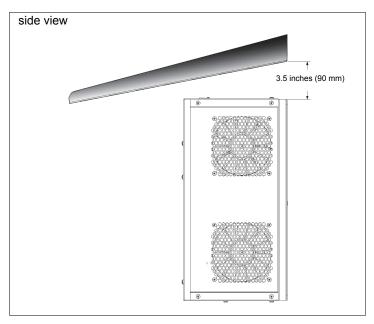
Drip Shield Placement (Inverter Front Panel Facing Up)
